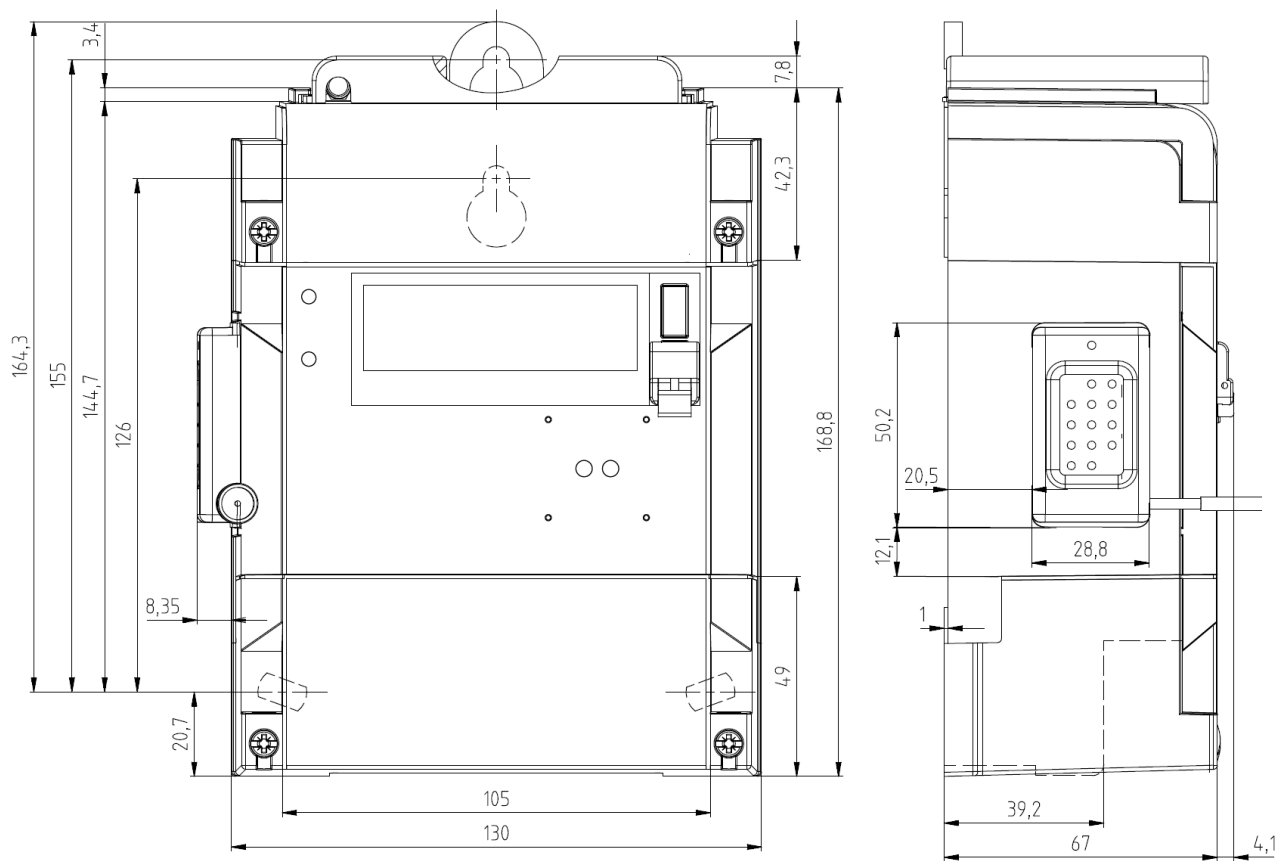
Dimensions of the single-phase meter, short terminal cover (in mm)
